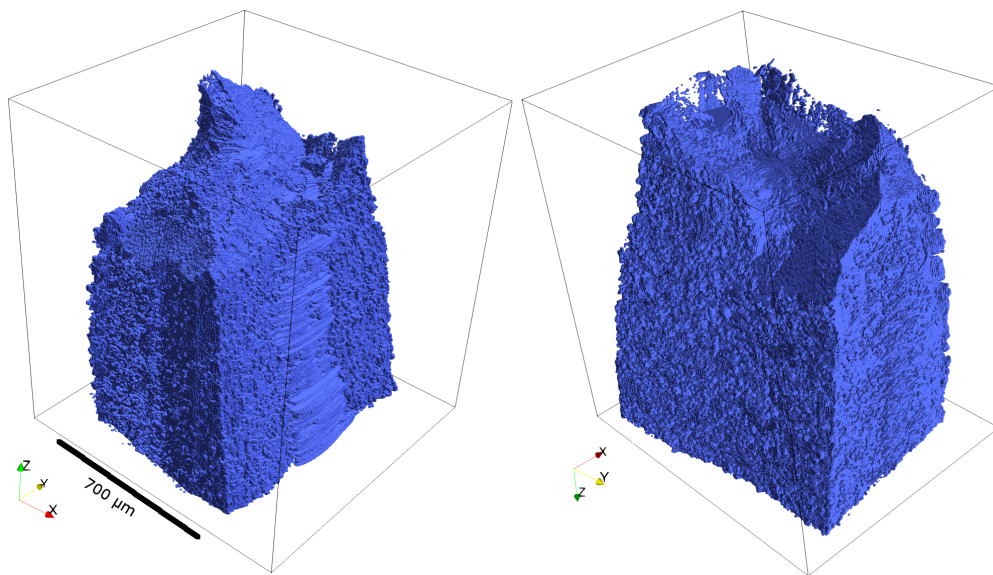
XCT scan of the two opposing fracture surfaces of specimen V3-4; left is the bottom, right is the top; scans show the classic “cup-and-cone” failure pattern indicative of ductile rupture in fcc metals.
